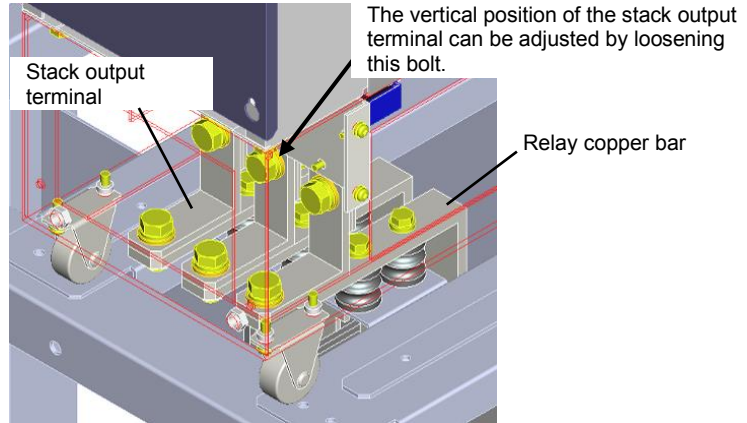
Precautions when connecting a relay copper bar
